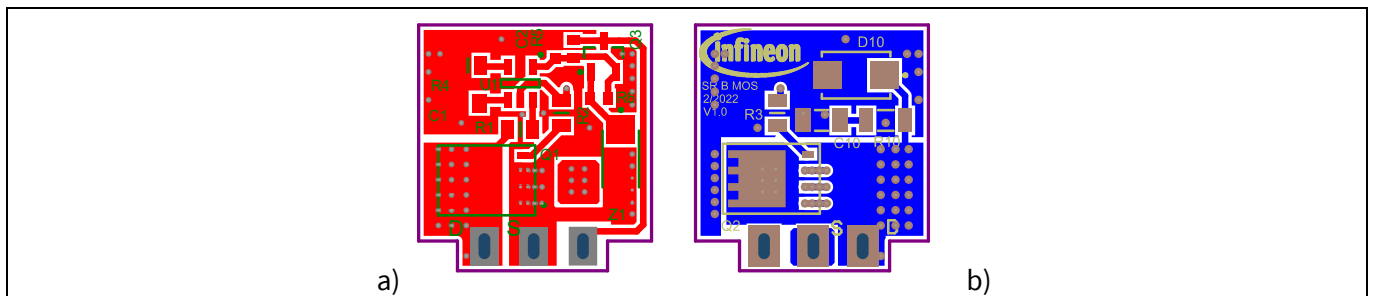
PCB of the V_{CC} board: a) top side and b) bottom side
